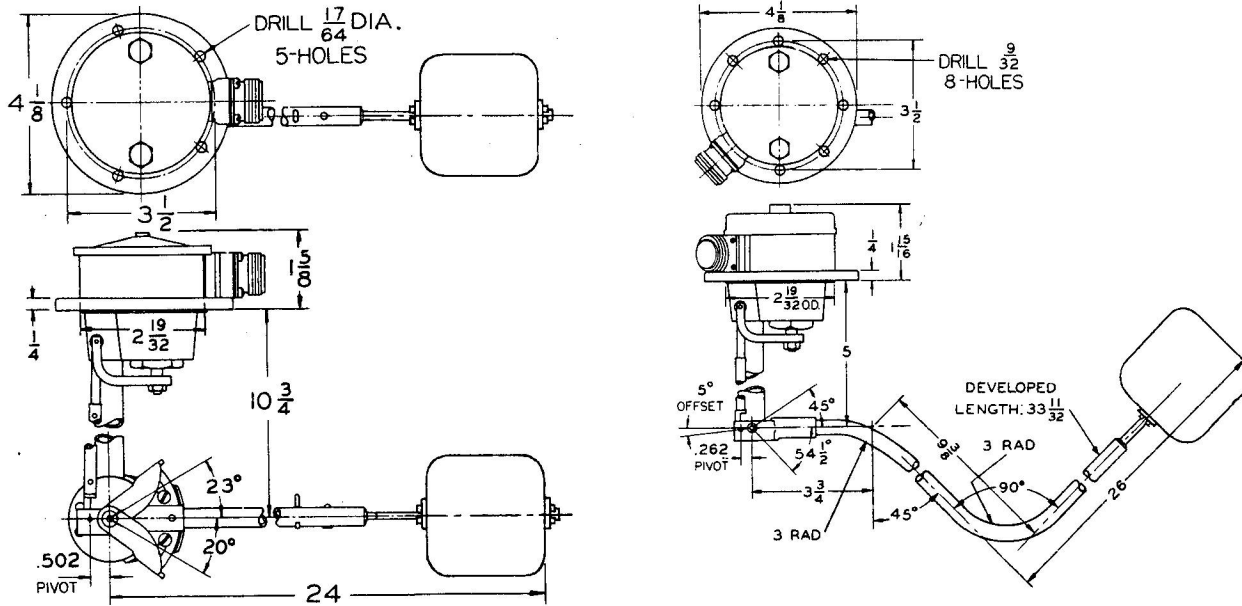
(Sheet 1 of 2 Sheets). General Dimensions
